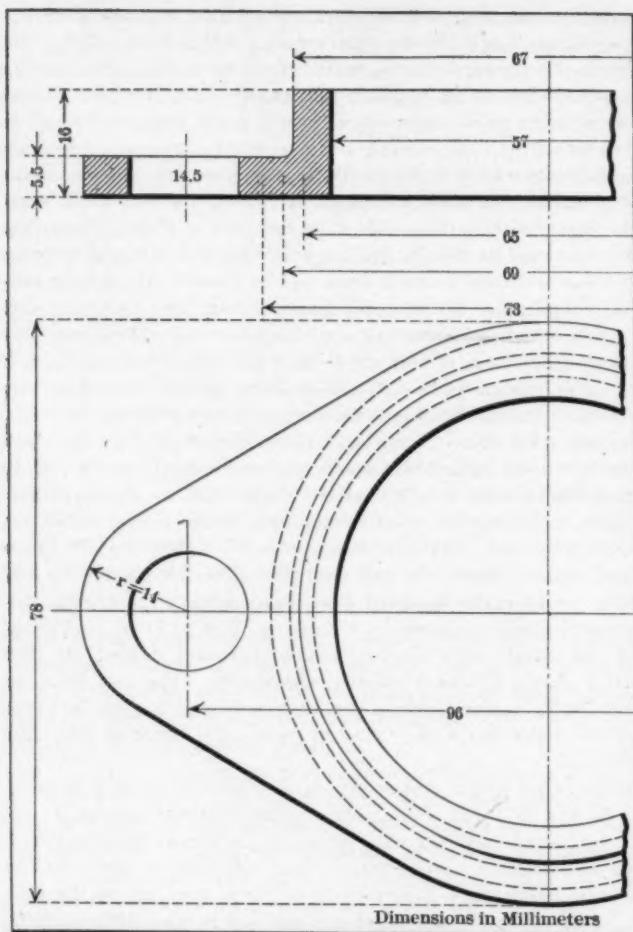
Pressed steel flange for use with inlet and exhaust manifolds of motors
